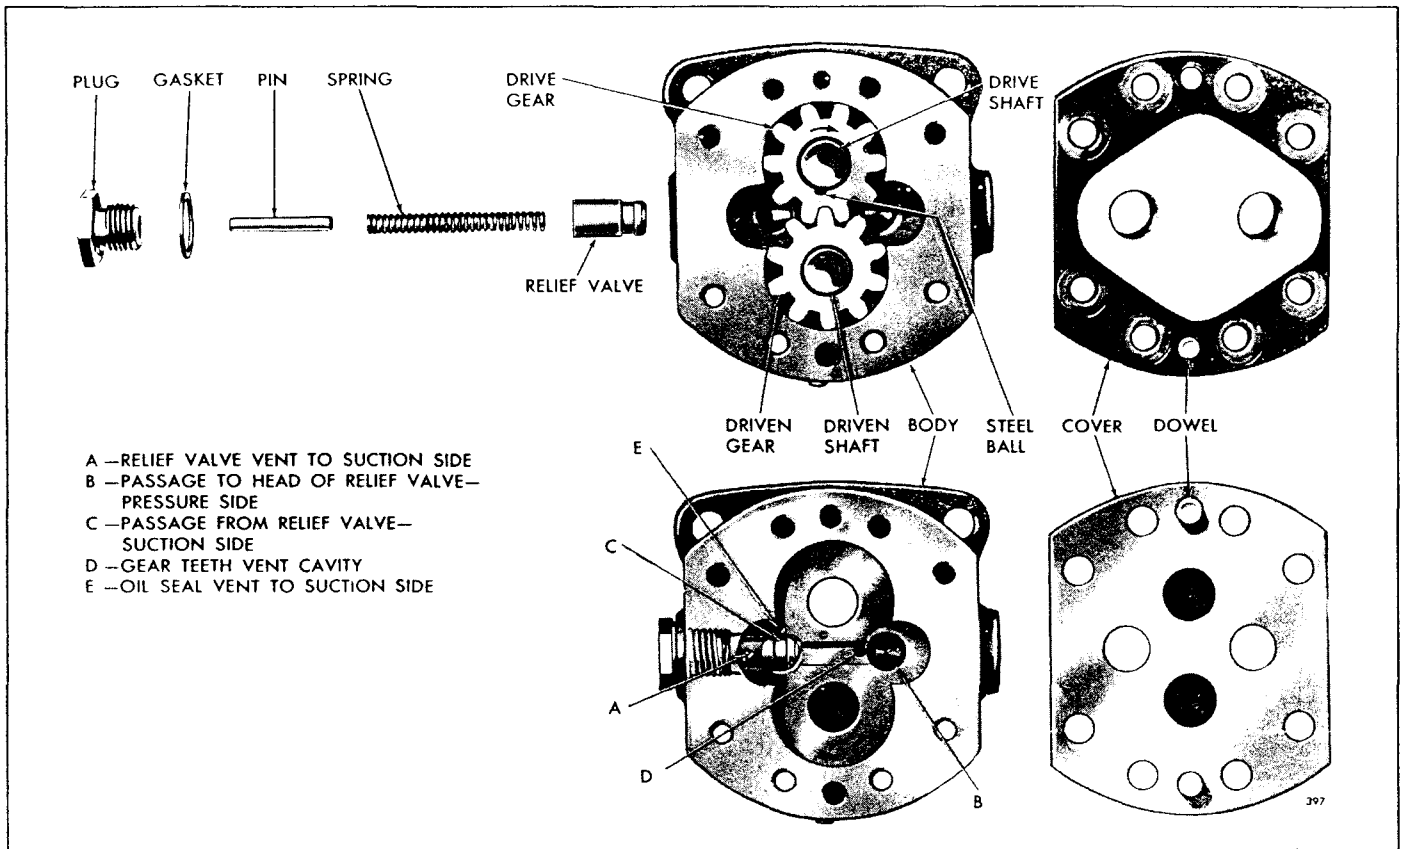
Fuel Pump Valving and Rotation (Right Hand Pump Shown)
